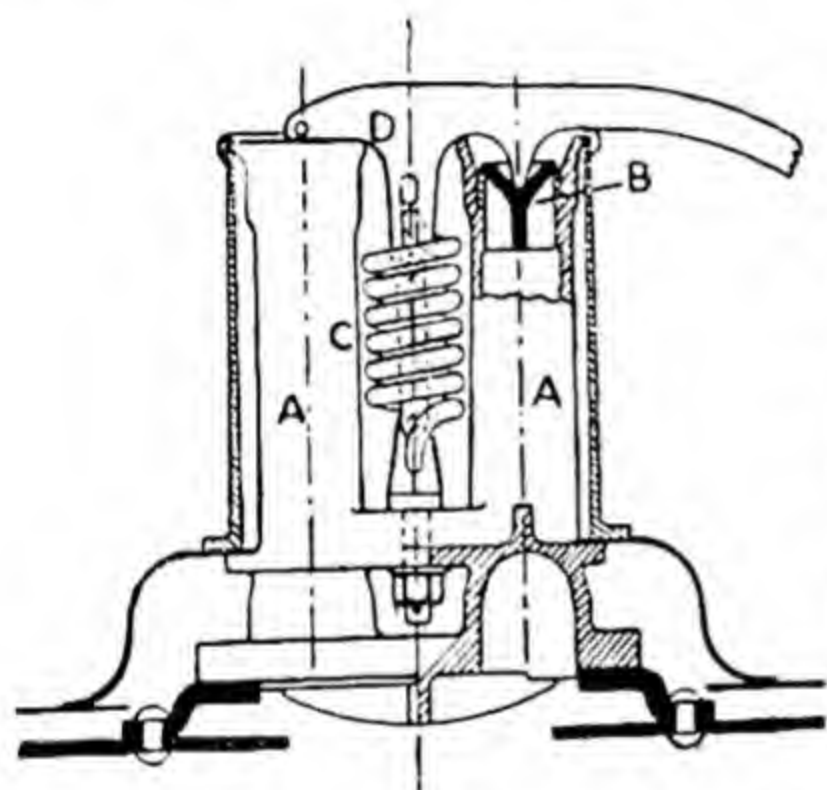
Ramsbottom safety valve for G.E.R. locomotive boiler.
